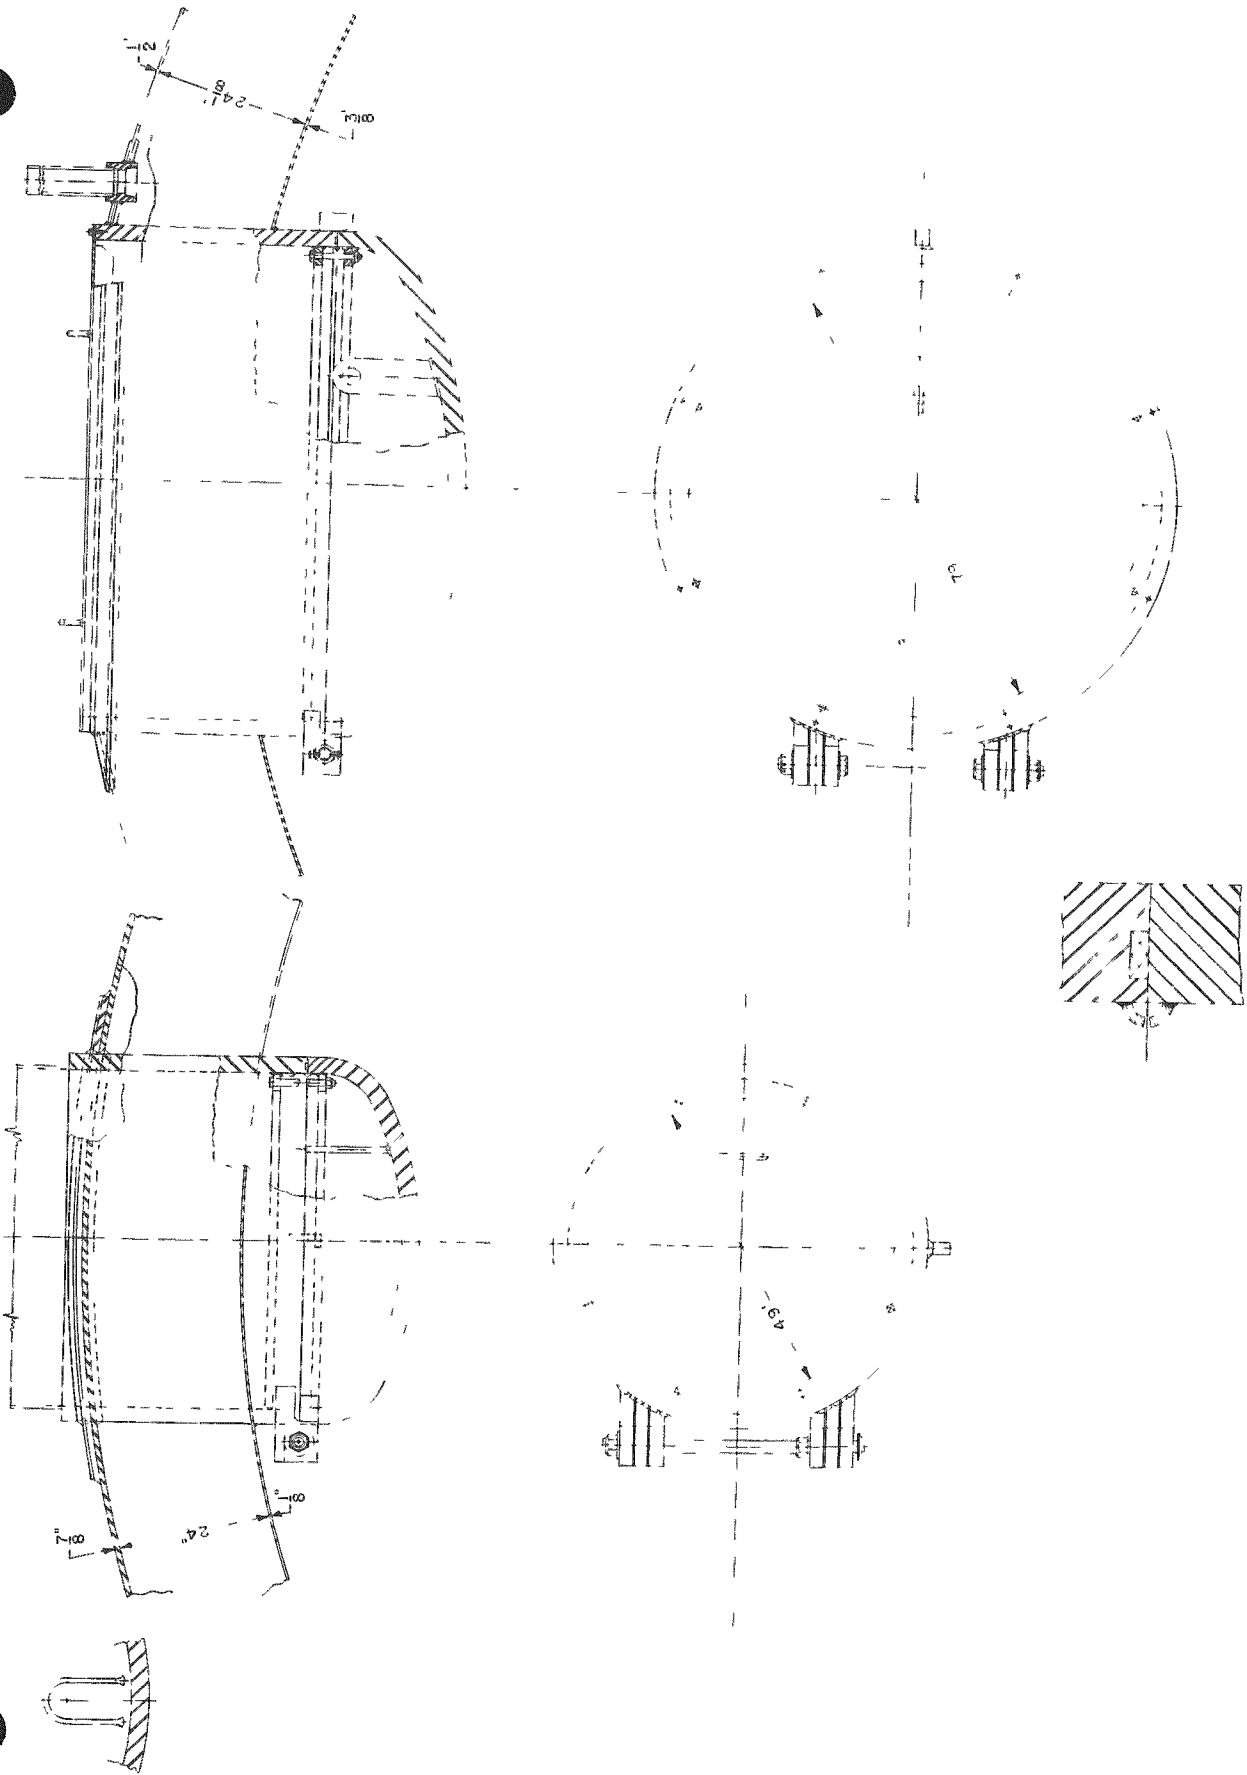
VAPOR CONTAINER MANHOLE DETAILS
